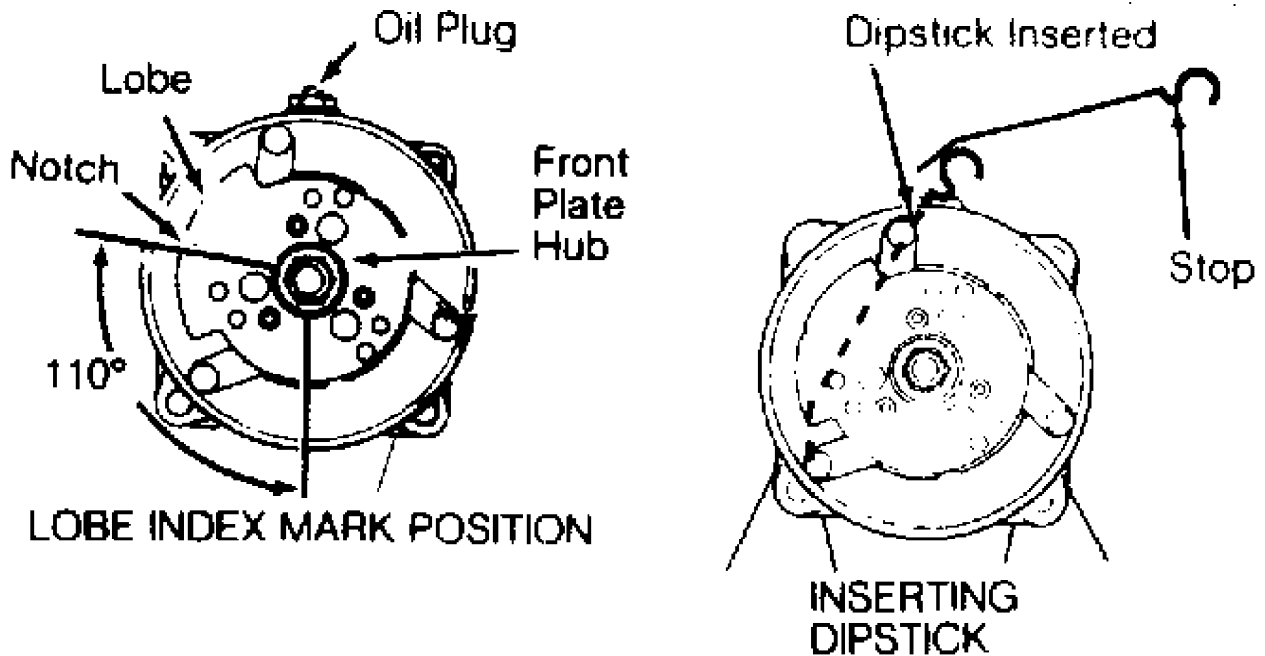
Checking Oil Level (Sanden 5-Cylinder & 7-Cylinder)
